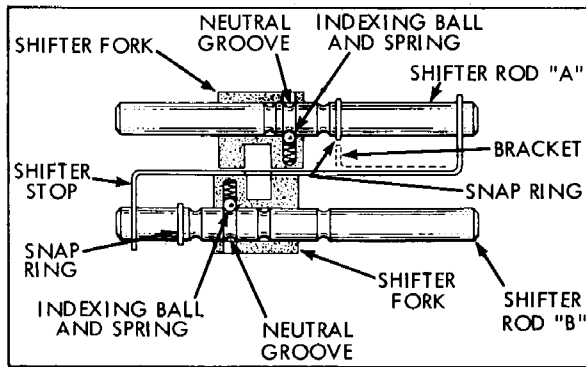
Four Stop, Four-Speed Transaxle Shifter and Fork Assembly
